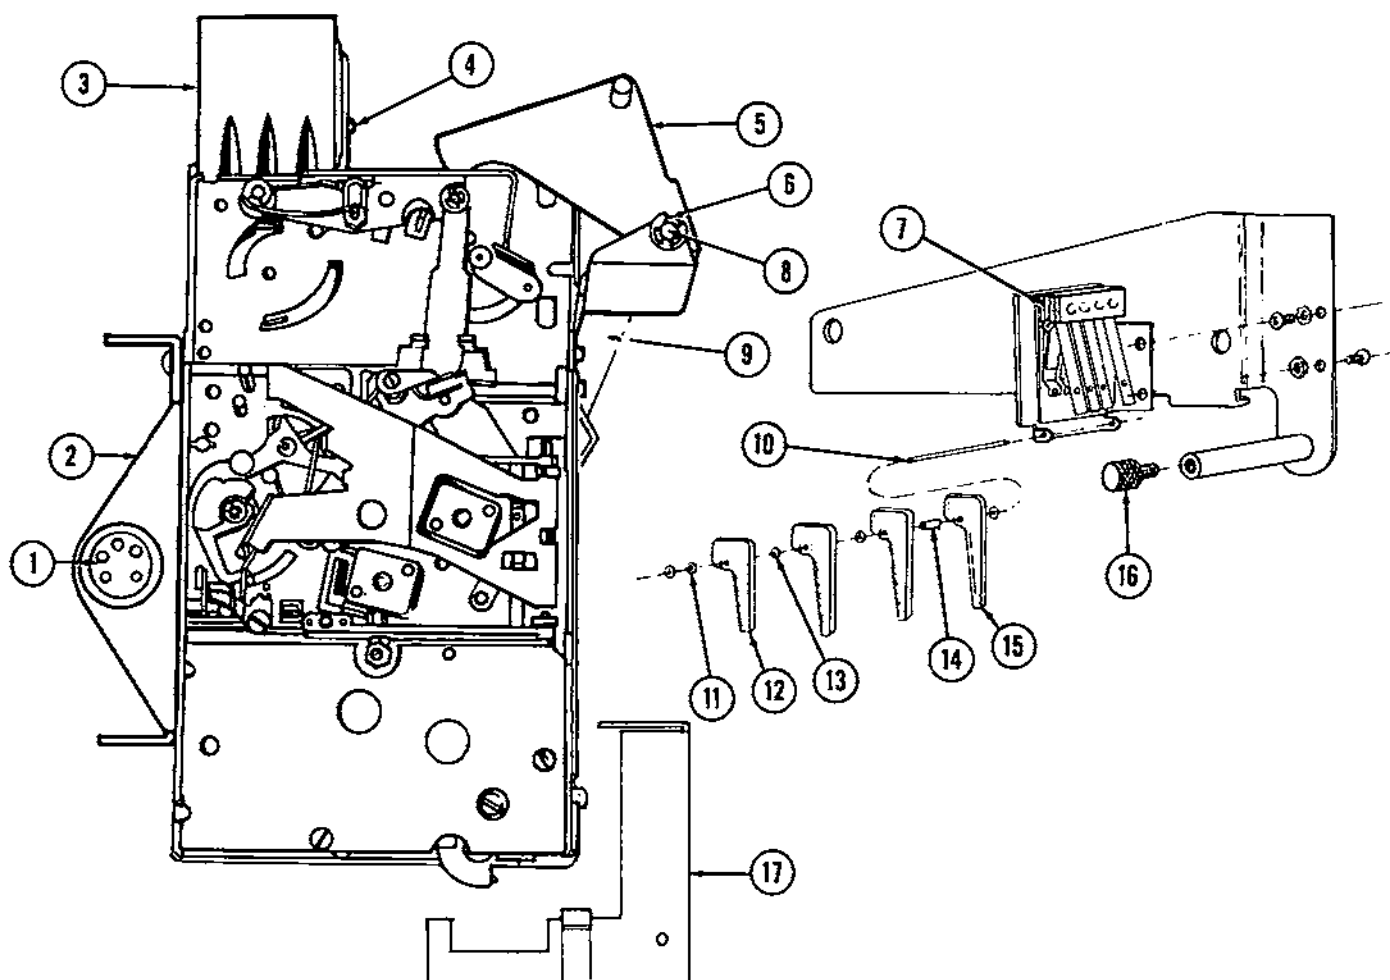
SLUG REJECTOR ASSEMBLY AND COIN SWITCH ASSEMBLY
